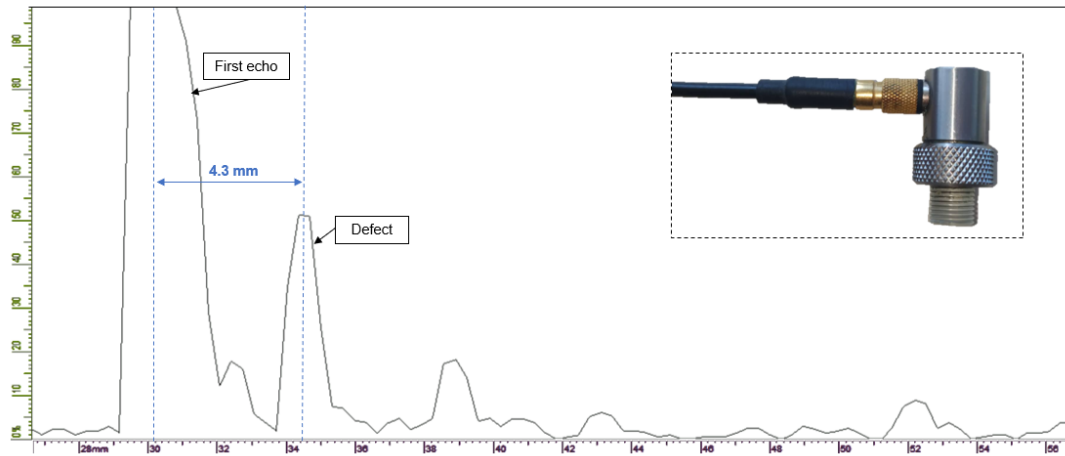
A-scan results for 5 MHz conventional UT probe using solder paste as couplant.
